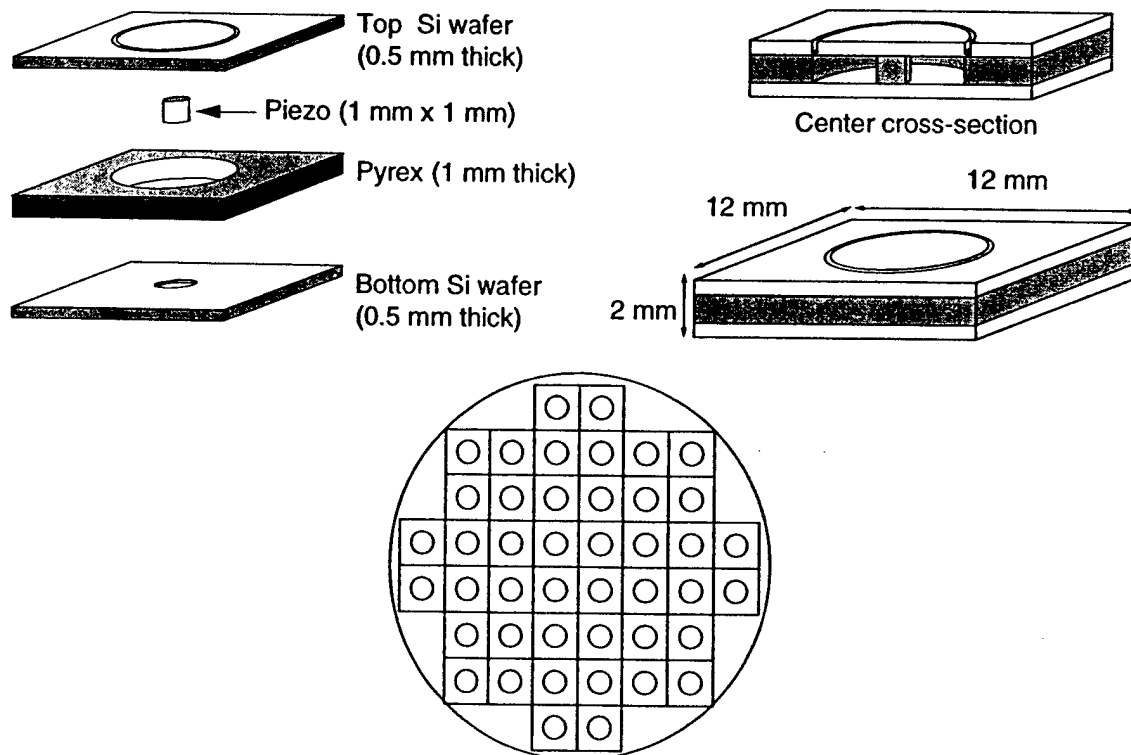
Mesoscale drive mechanism components. Clockwise from top left: exploded components, assembled unit, wafer mask. The hole in the Pyrex is 6 mm in diameter. The annular ring in the top wafer has 5.7 mm I.D. and 6 mm O.D.
